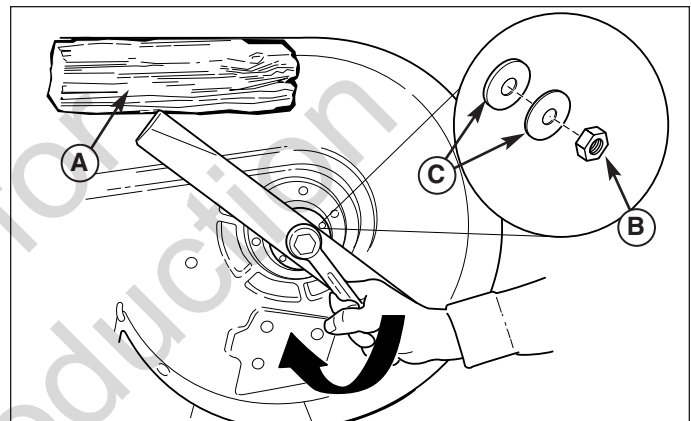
Blade Installation Mowers (38" & 42" Mowers)
